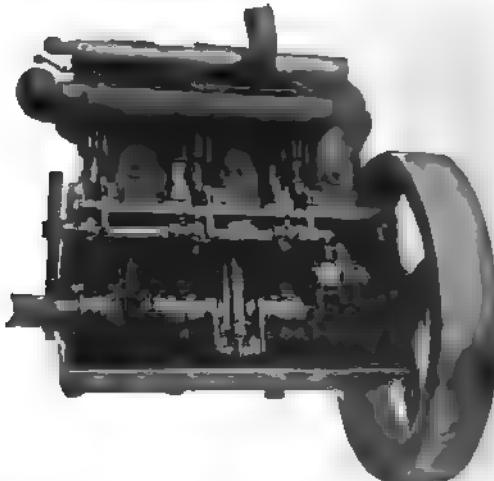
The Duryea Three-Cylinder Gasoline Vehicle Engine, with half the crank case sheathing removed, showing cranks, crank shaft, cam shaft, and working parts. The three cylinders have common supply and exhaust tubes; the charge is controlled by a single throttling link, shown at the top, and the igniting circuit has three bridges for the three cylinders. Cranks, as indicated, are at 120 degs.
